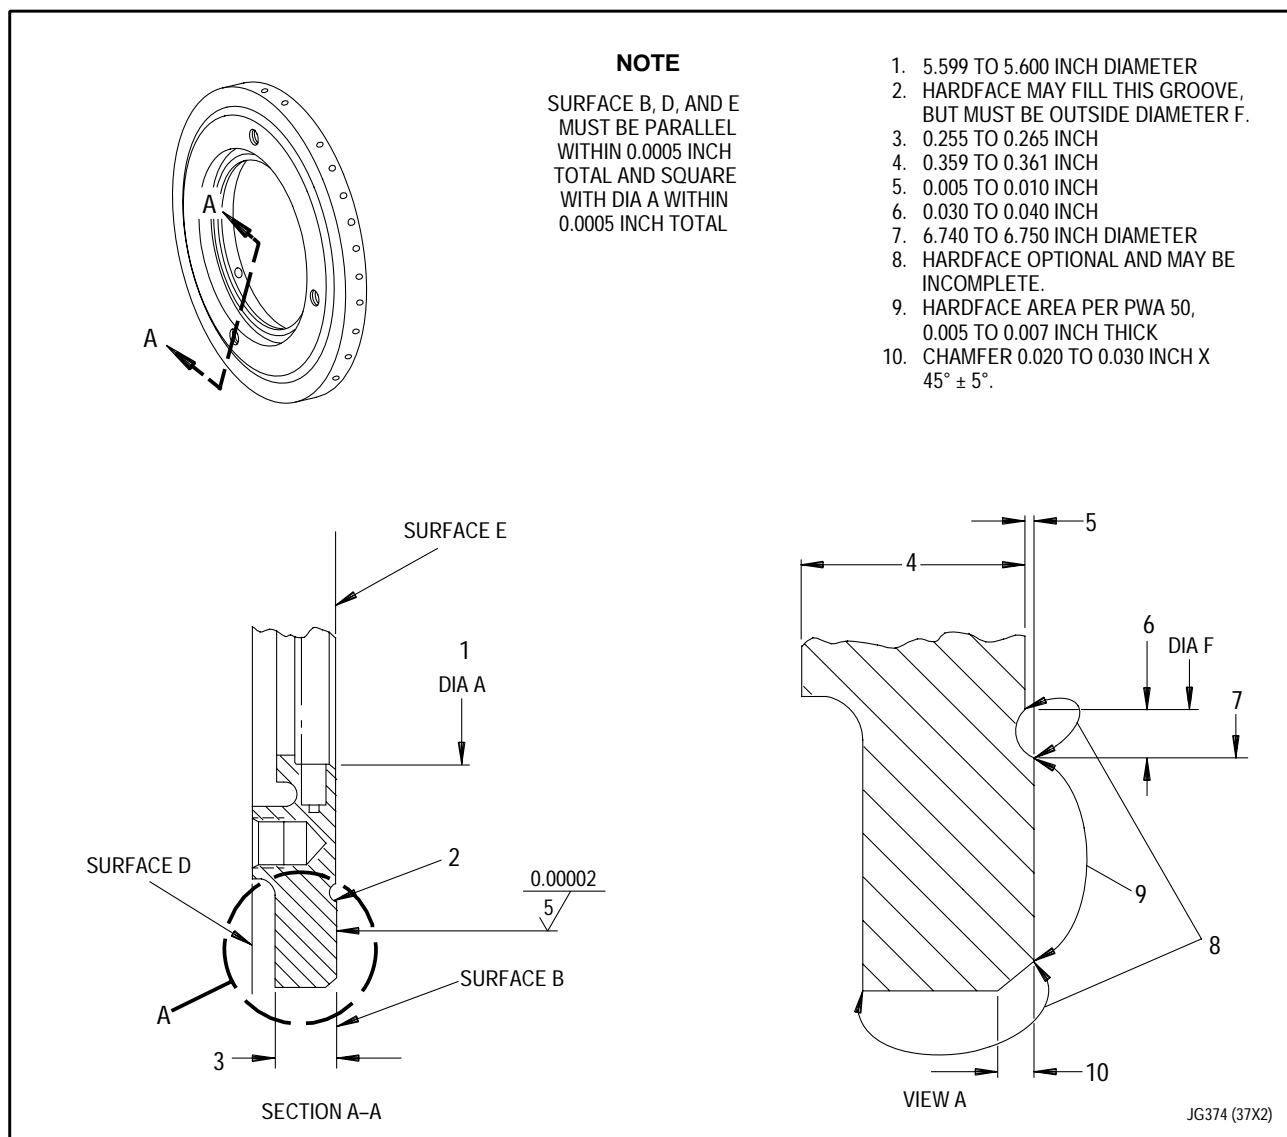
No. 3 Bearing Rear Seal Seat - Flame Deposition Coating and Lapping Repair (PN 4022668)
